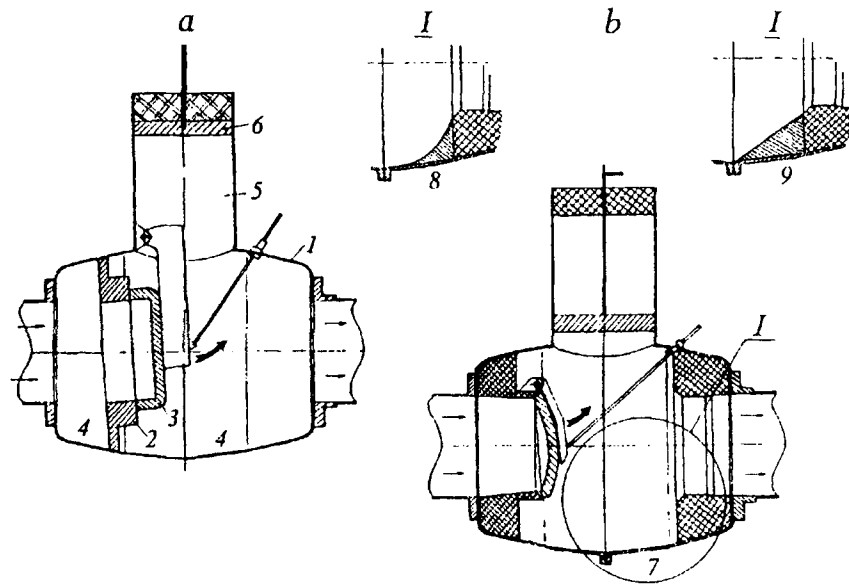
Diagram of initial return valve (a) (1) valve frame; 2) seat; 3) shut-off disk; 4) cavities ahead of and beyond seat; 5) assembly hatch; 6) moving insert and model of return valve with convergent inlet (b) (7) variant 1 of flow section beyond seat; 8) variant 2; 9) variant 3).
